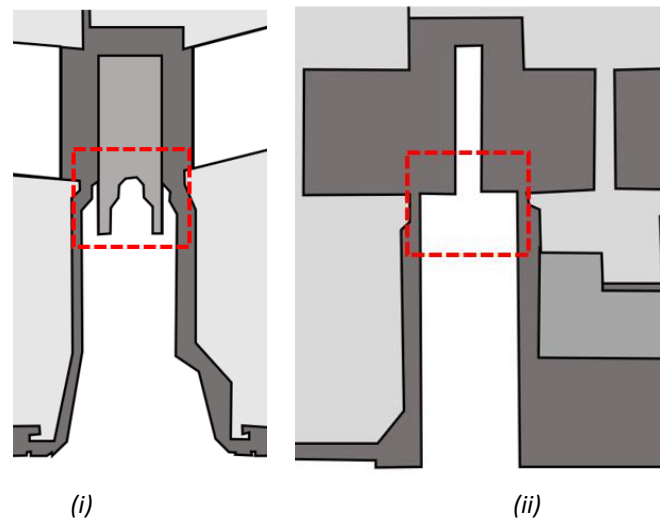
(i) Detailed rotor and (ii) continuous rotor geometries
